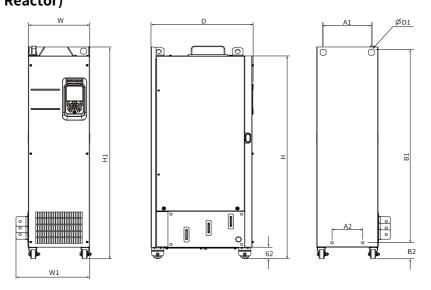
Outline dimensions and mounting dimensions of T10 to T12 models (without AC
